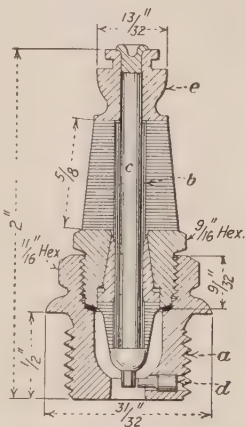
Cross-section of airplane spark plug. (Courtesy B. G. Corp.)
